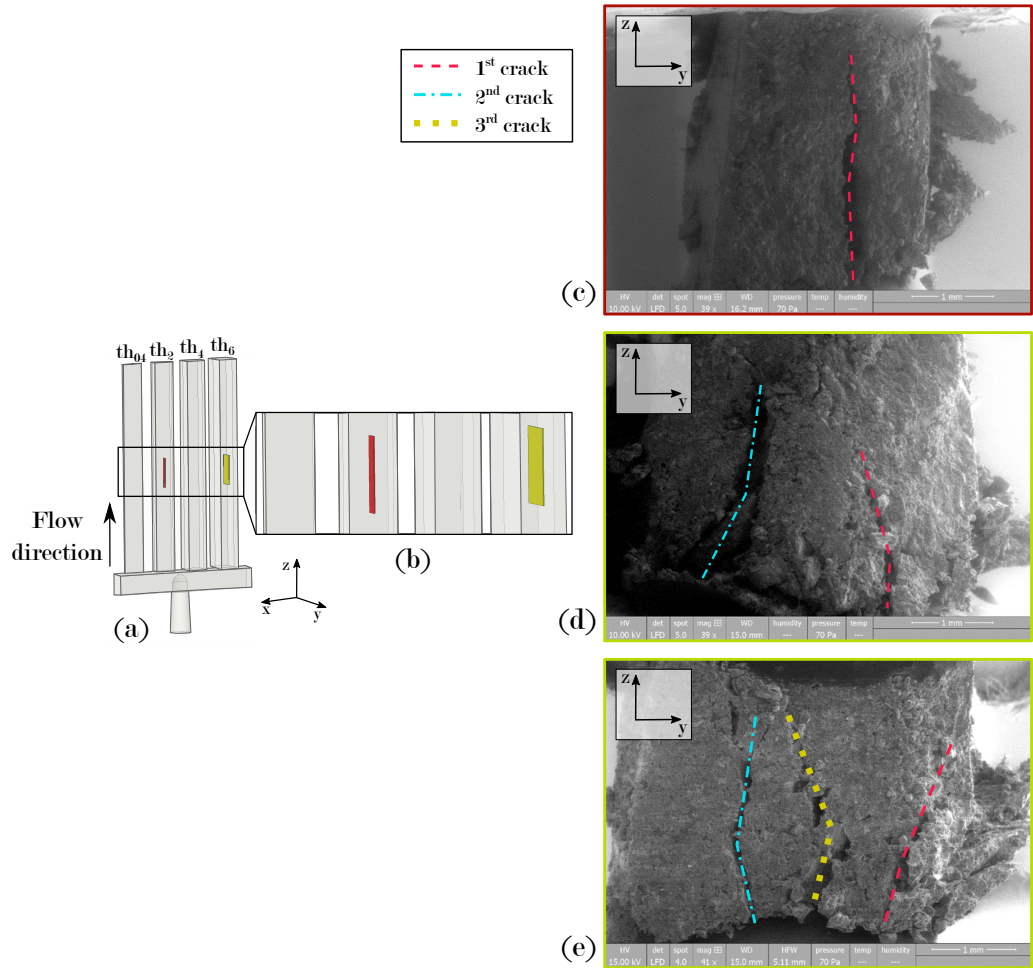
Examples of cracked samples under uniaxial compression - Part thickness in the  $y$ -axis of the reference coordinate system. (a) Moulded part. (b) Samples location. (c) 2 mm channel,  $T_{mould}=30^{\circ}$  C. (d) 6 mm channel, RHCM. (e) 6 mm channel,  $T_{mould}=30^{\circ}$  C.
